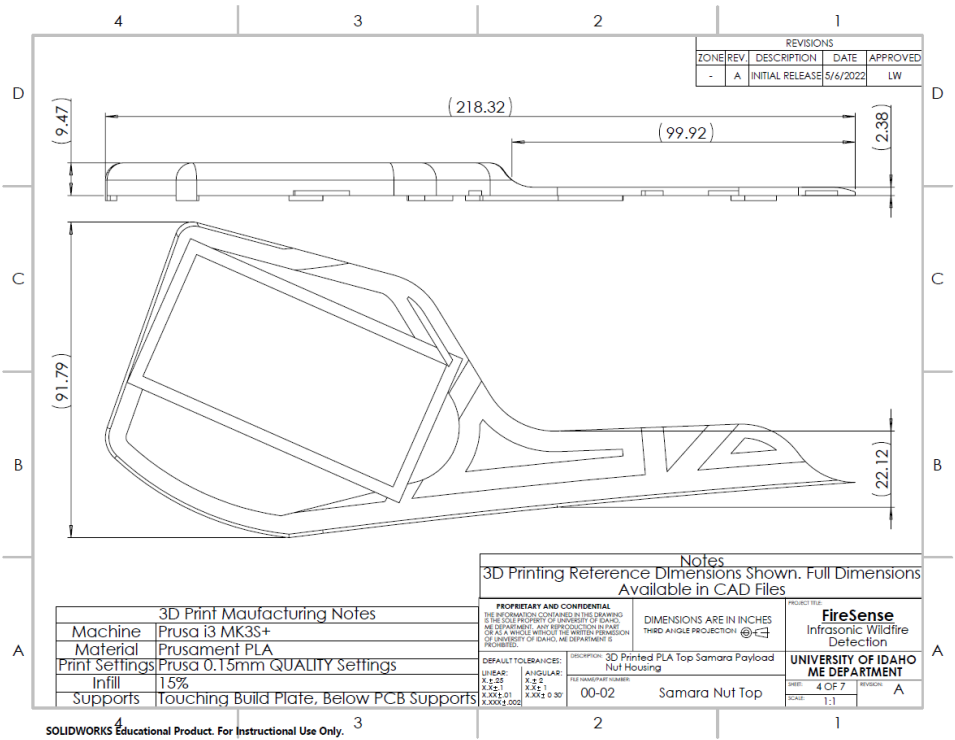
Technical Drawing Package Sheet 4, Samara Nut Top
